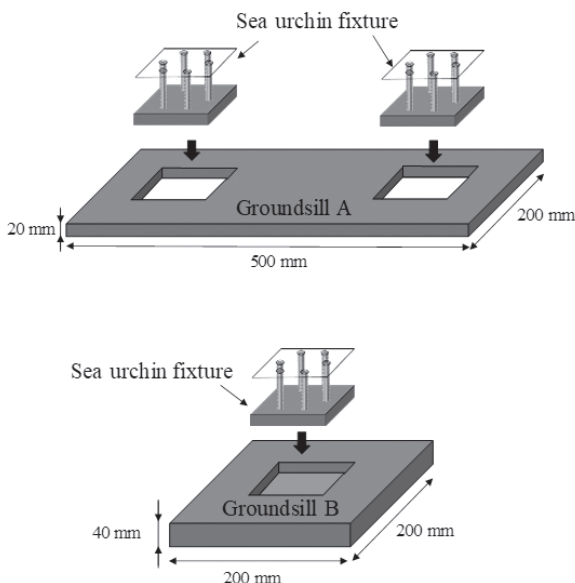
Structural drawing of groundsills A (upper) and B (lower) for sea urchin fixture. Groundsill A could hold two sea urchin fixtures and B could hold one sea urchin fixture.
